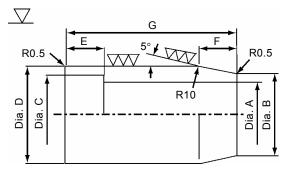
Special Tool for Press Fitting of Rod Cover W4GB-03-09-011
